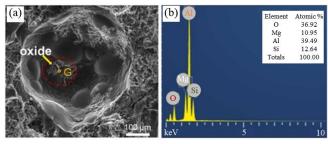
Analysis of gas pores on fracture surface of A356 Al alloy tensile specimens [24]:
